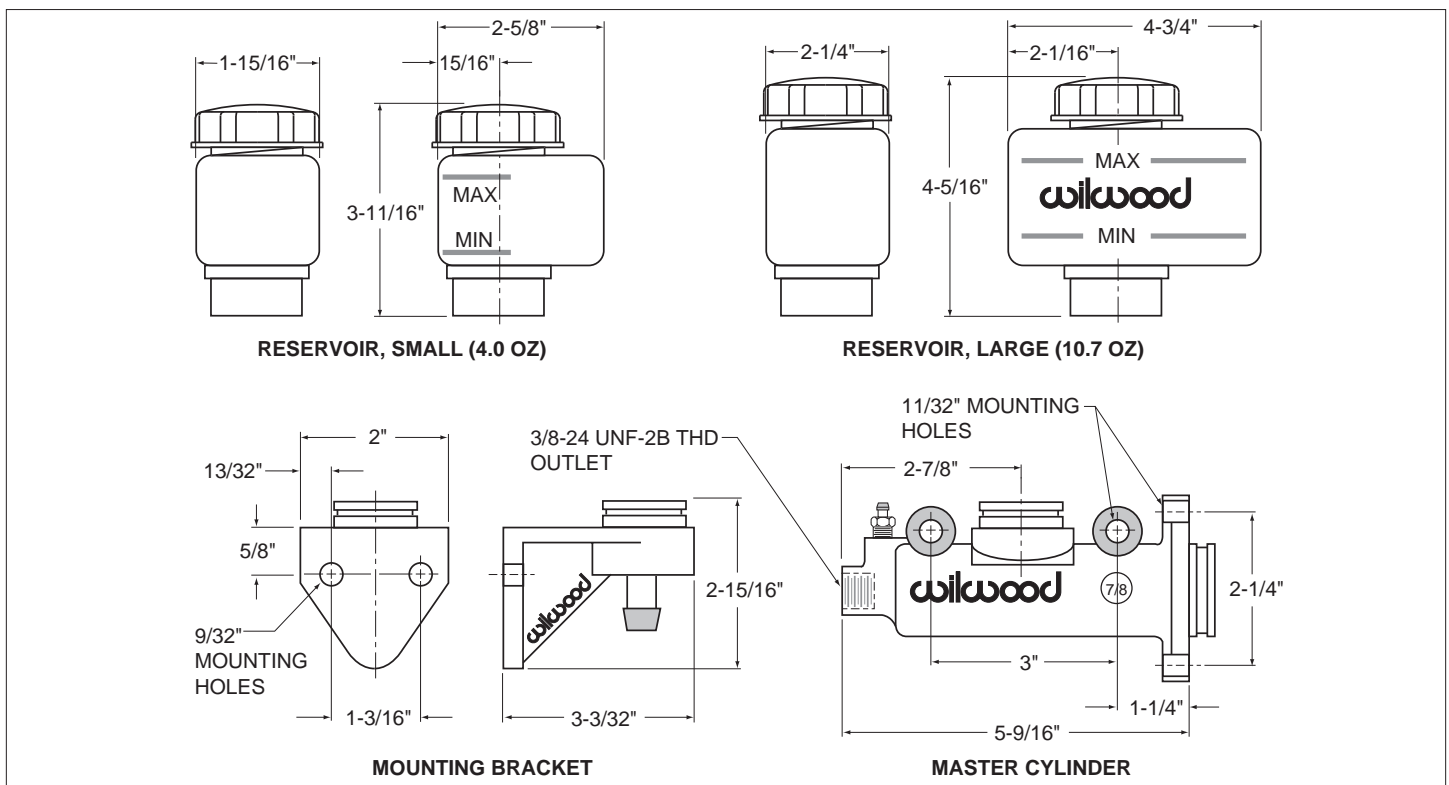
Minimum Mounting Requirements for Mounting Bracket, Master Cylinder and Reservoirs
